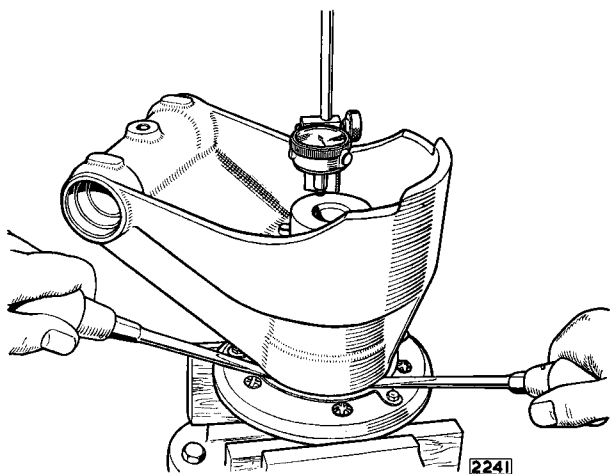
Checking the hub bearing end float with a dial tester indicator (Churchill Tool No. J.13)
